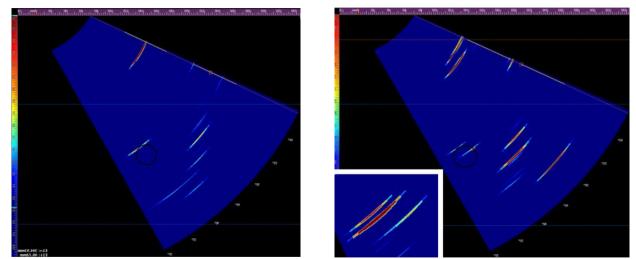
full skip inspection, Left image shows a bolt hole with no defects, Right image shows a bolt hole with multiple cracks.
